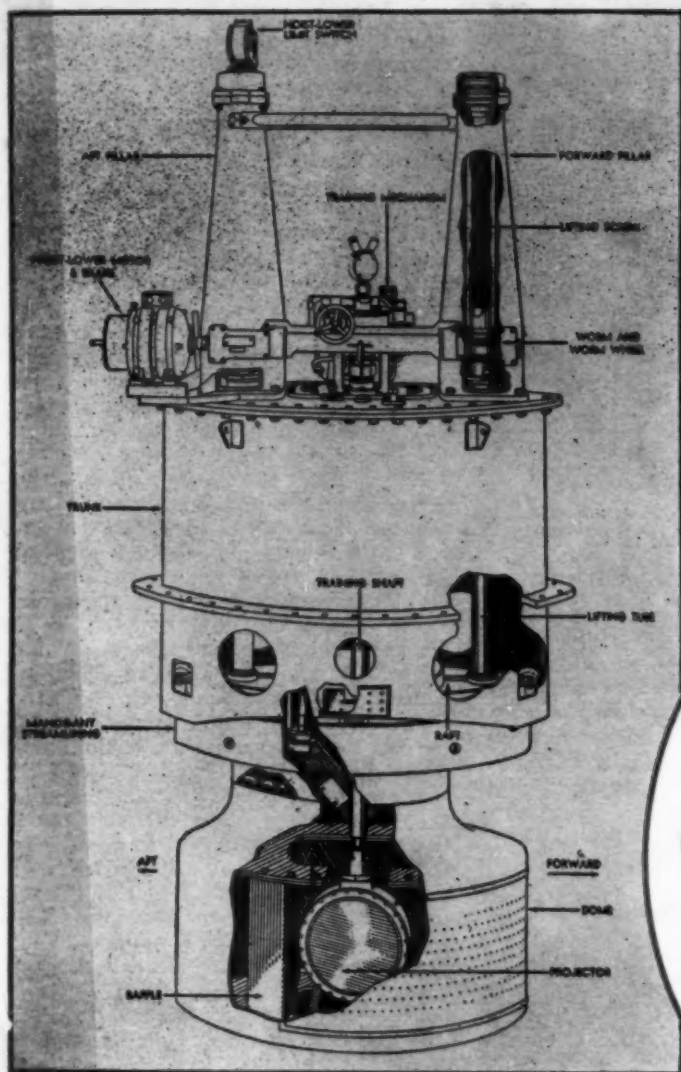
Cutaway drawing of sonar dome and retracting gear.
